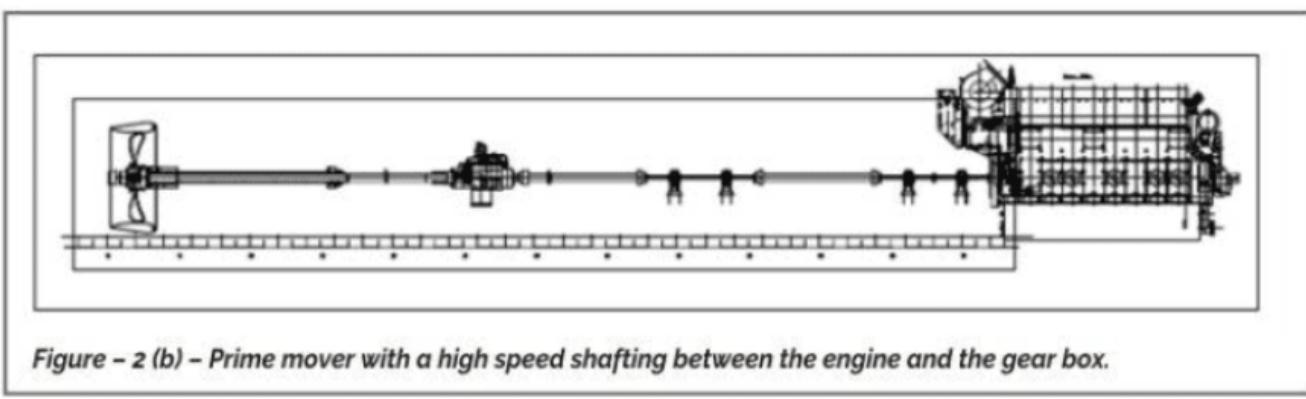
(b) – Prime mover with a high speed shafting between the engine and the gear box.
